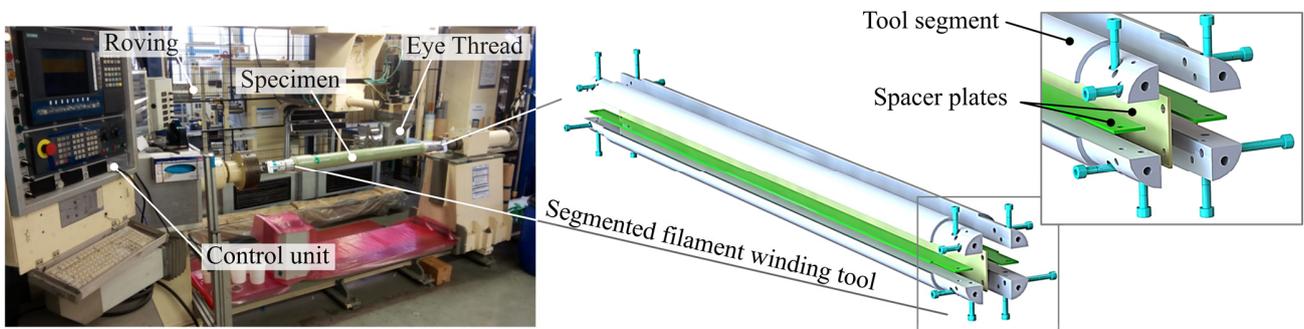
Manufacturing of the generic tubular structure using a filament winding machine
